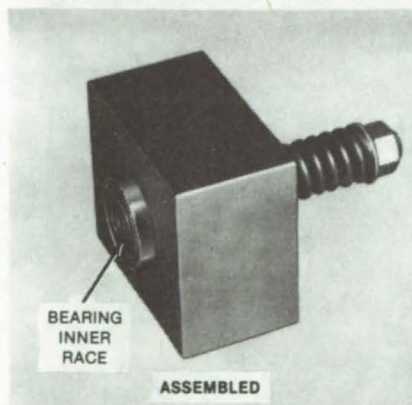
A Split, Tapered Ring, at one end of the threaded bolt, expands to hold the inside of the inner race of the bearing assembly; the nut, at the other end of the bolt, adjusts the amount of spring tension. The new piece of hardware grasps the bearing firmly without interfering with the grinding operation.
